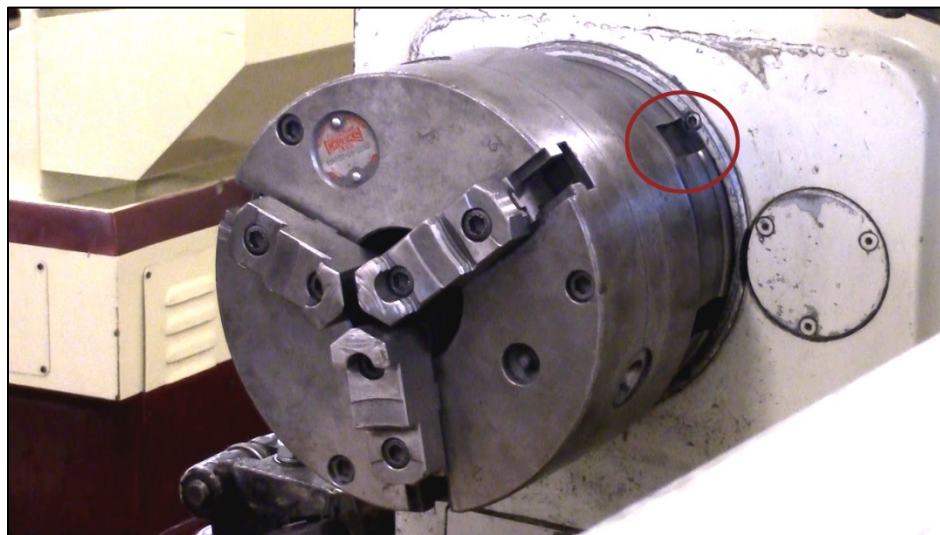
A PHOTO OF THE CHUCK MOUNTED ON THE MACHINE. NOTCHES ARE AROUND THE THREADED COLLAR TO HOOK THE SPANNER WRENCH TO.
